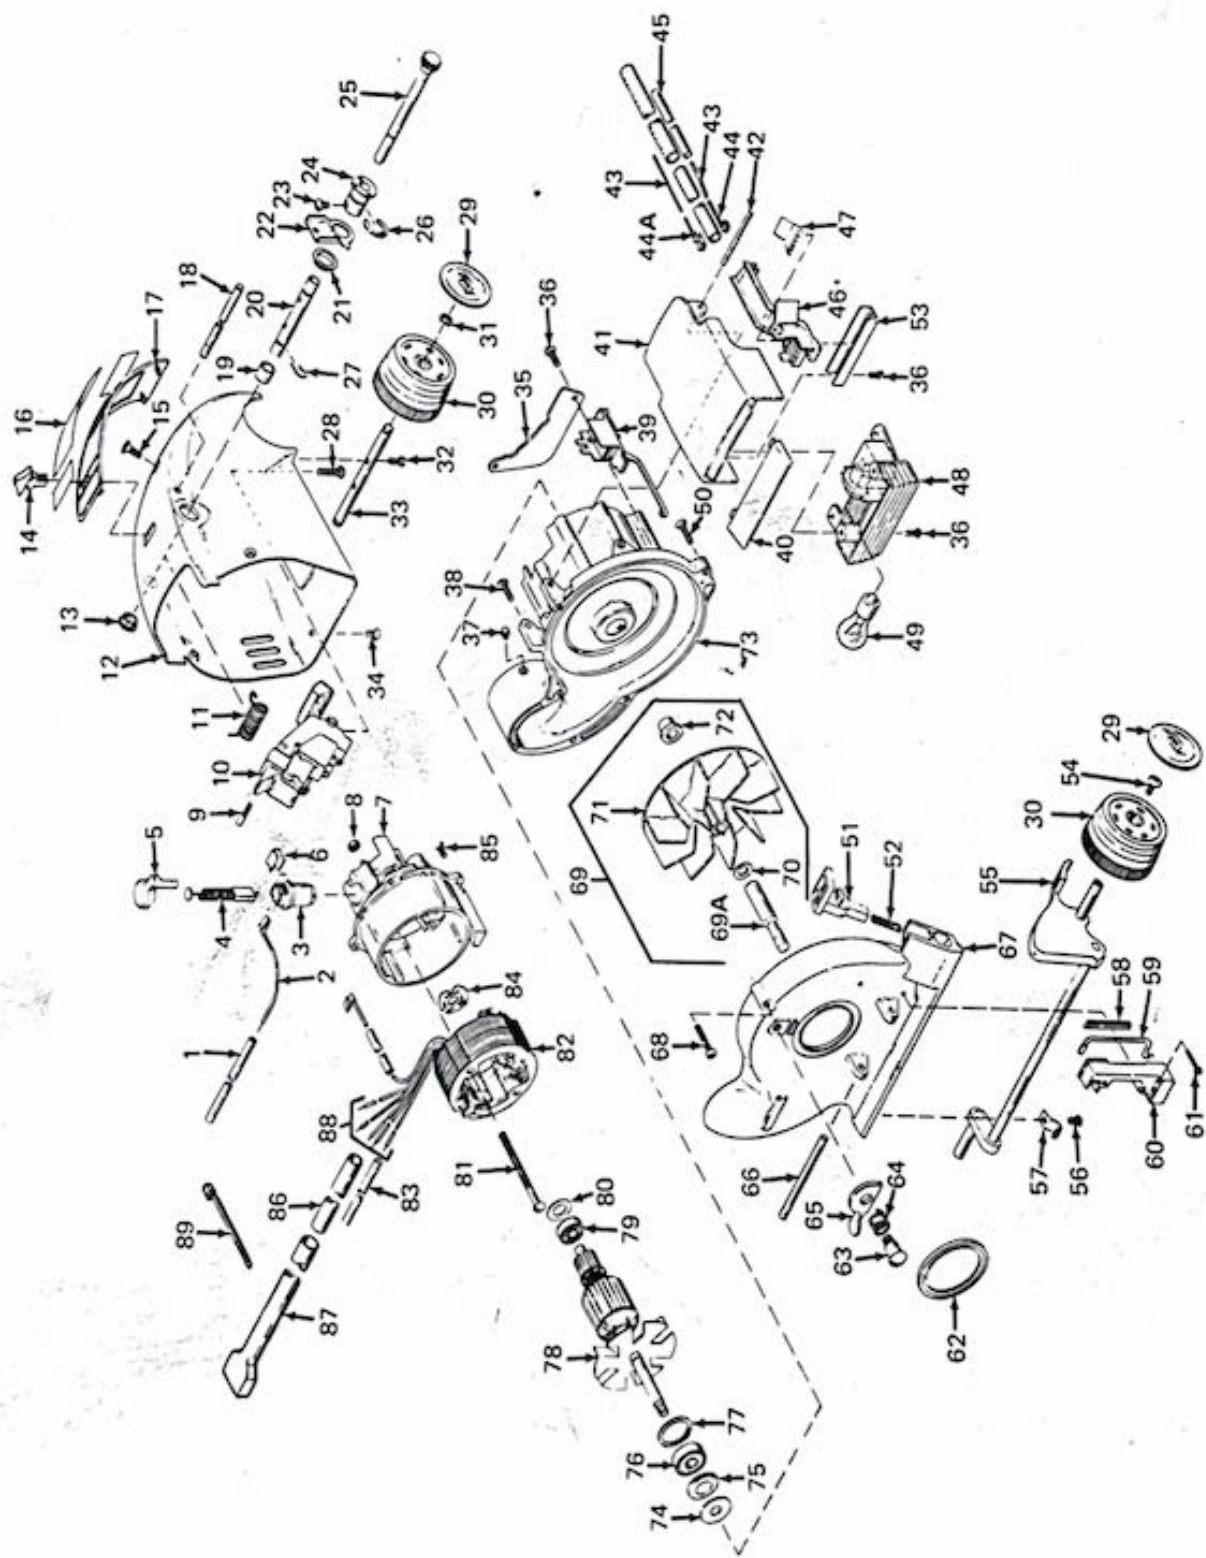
HERITAGE Models 1HD and 1HC motor group, exploded view
